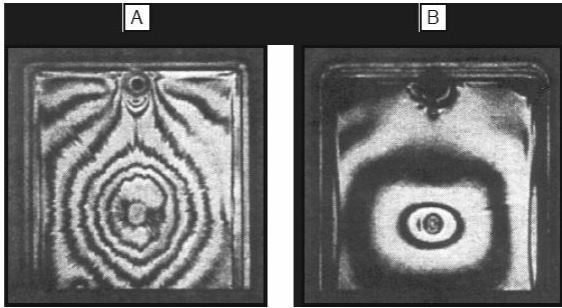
Isochromatics in polycarbonate parts molded with (left) piston-type and (right) screw-type injection molding machines
